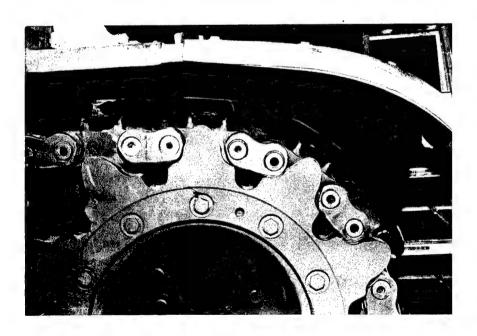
Track and sprocket misalignment and excessive end connector wear (250 miles).
